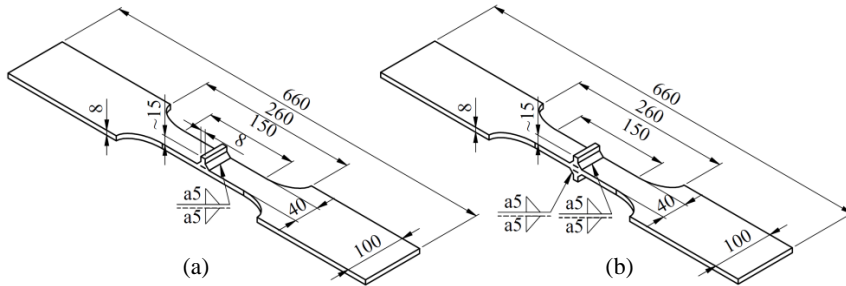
Shape and dimensions (in mm) of S960 NLC transverse attachment specimens tested under axial and bending loads: (a) NLCT joints and (b) NLCX joints.
